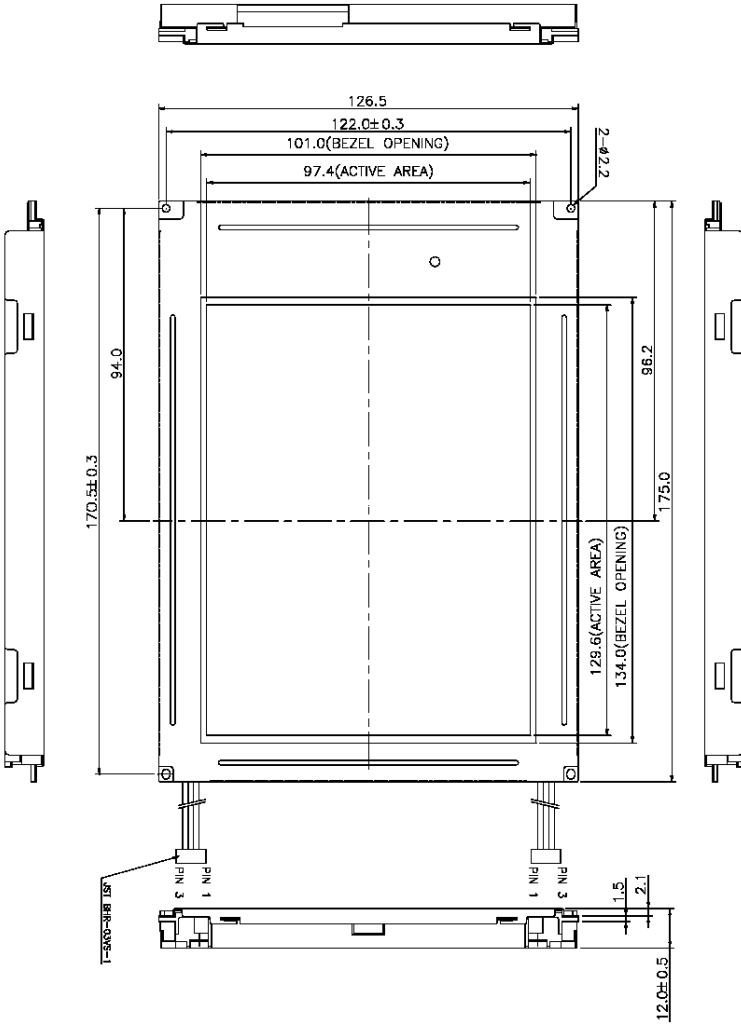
Mechanical Drawing of TFT LCD Module (part 1)
